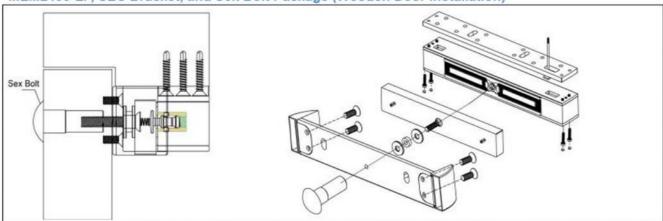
MEM2400-LP, Security Bracket (SEC 2400) and Sex Bolt installation for out-swing wooden door, sex bolt is used to enhance the holding strengthen of SEC bracket.
